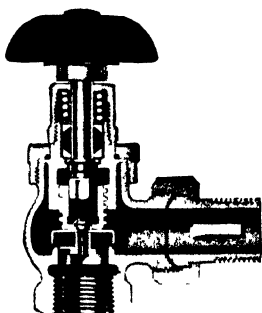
Webster Type "WB-P" Brass Radiator Valve
